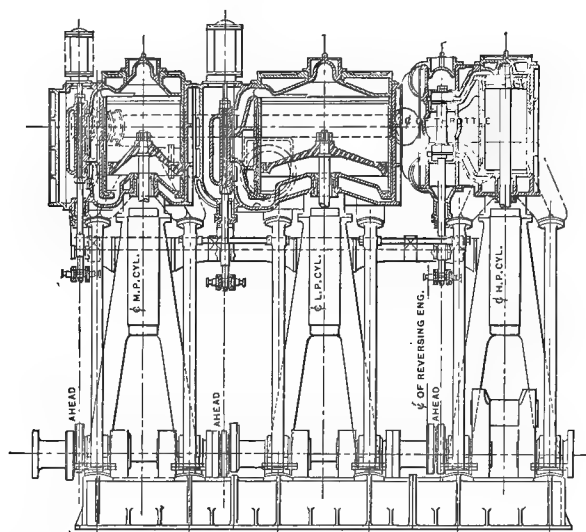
Triple-expansion marine engine. Type of the steamer *Minnesota*.
